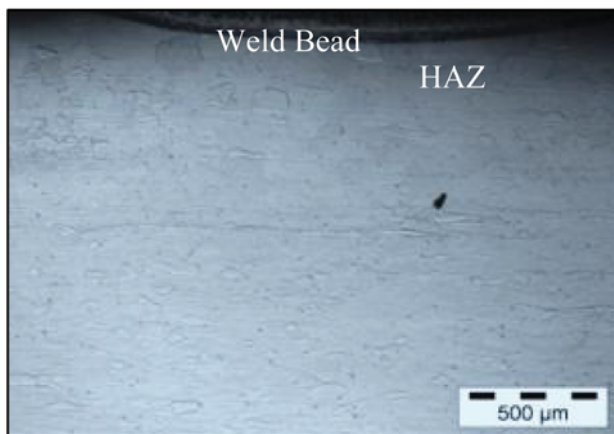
4 mm thick AISI 409 welded at a heat input of 0.1 kJ/mm (Practice W)
